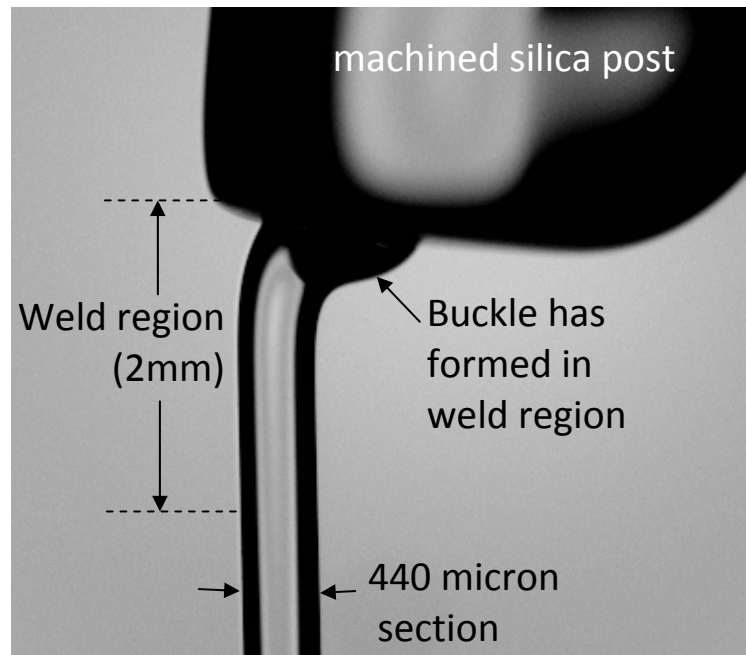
Picture showing a bad weld which has had a small shear stress applied during the welding procedure.
